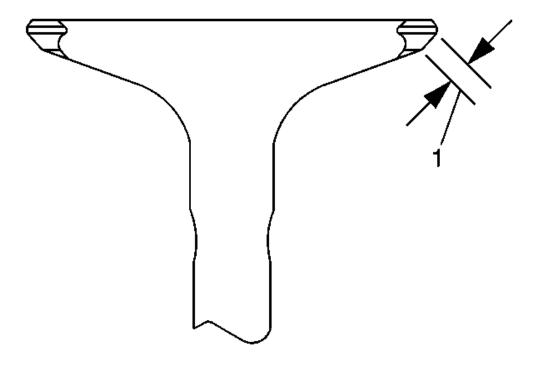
Measuring Seat Width On Valve Face Courtesy of GENERAL MOTORS COMPANY
